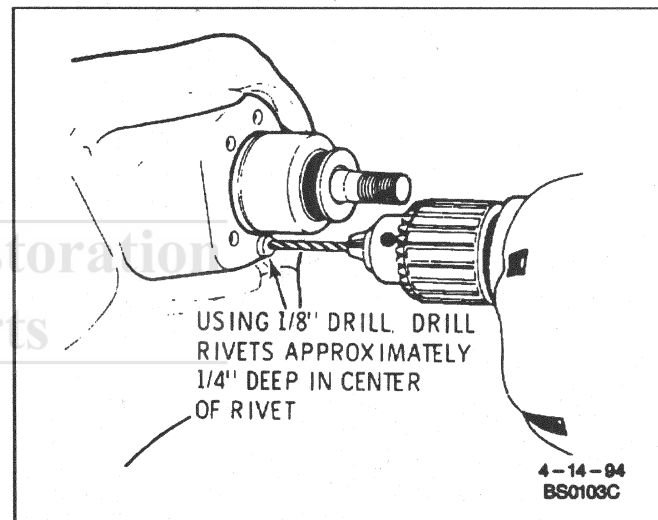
Drilling Front Upper Control Arm Ball Stud Rivet
